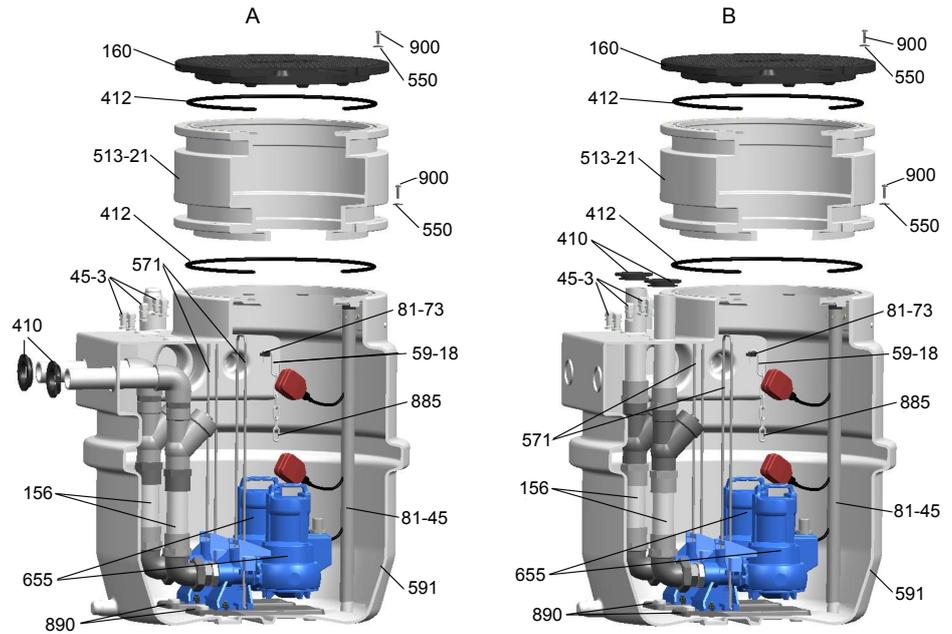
Exploded view of versions with horizontal and vertical discharge outlet
